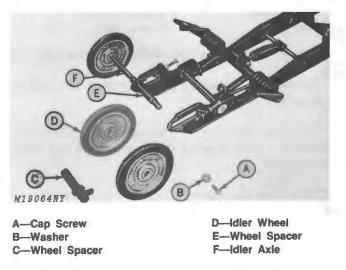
Removing Rear Idler Axle, Wheels and Spacers
